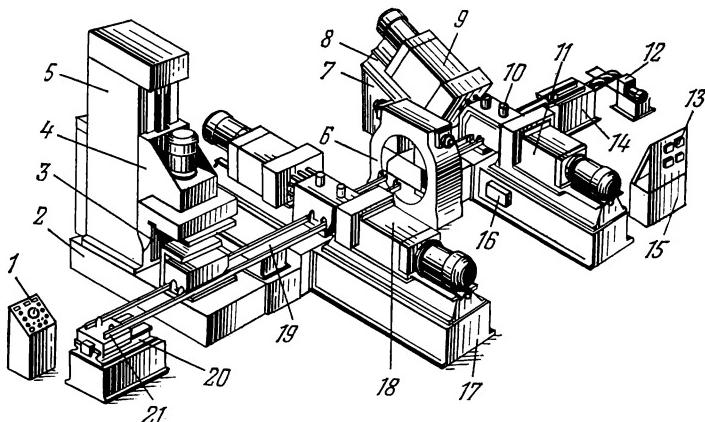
Schematic diagram of a section of an interlocked transfer machine designed for machining housing-type parts.
